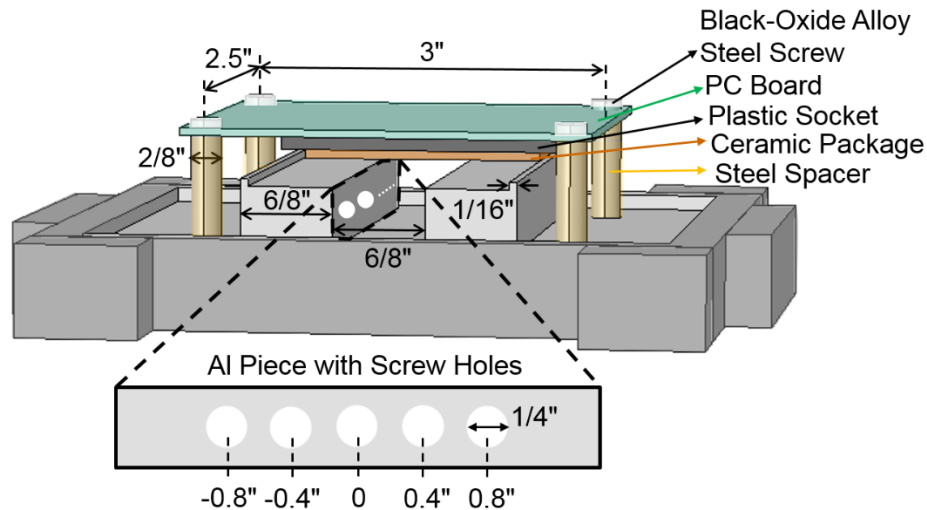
Printed-circuit board mounting on the sled of the split Hopkinson bar test setup.
